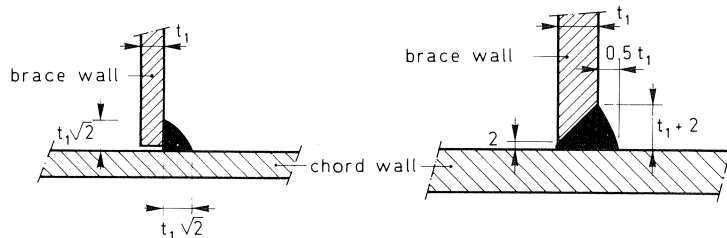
Fillet weld, when $t_1 < 8$ mm.
